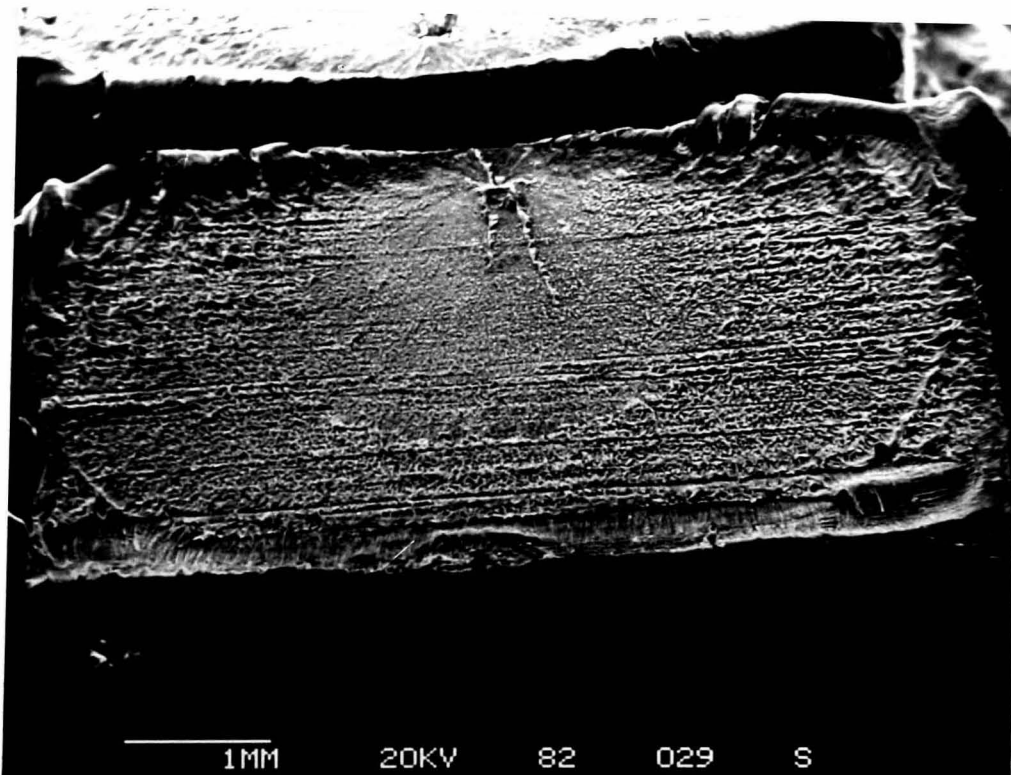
a) Fracture surface of 32mm CHDPE-F/20 pipe.
